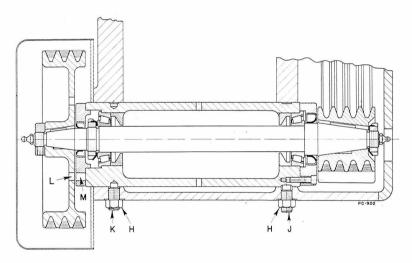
Section Showing Headstock Spindle Drive Adjustment
